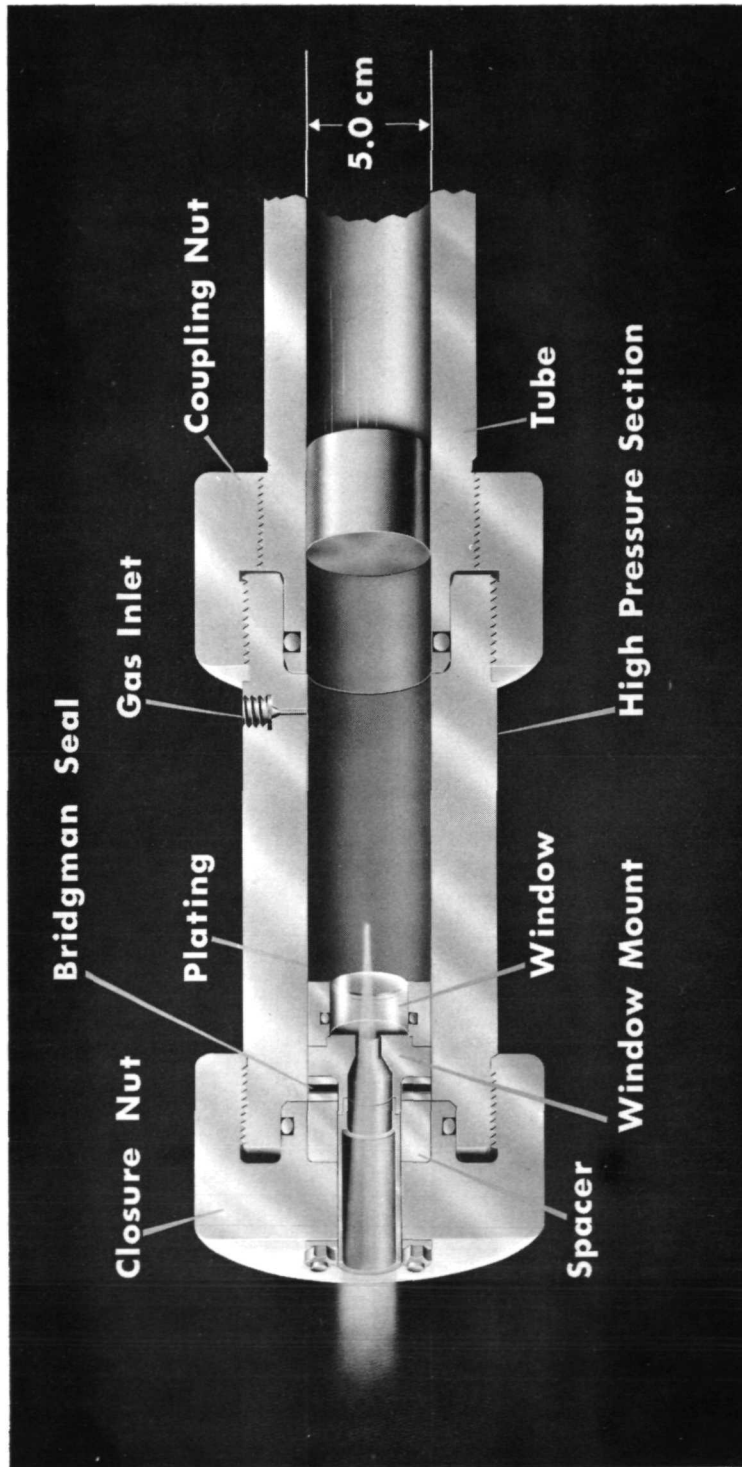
INITIAL HIGH PRESSURE SECTION ASSEMBLY
